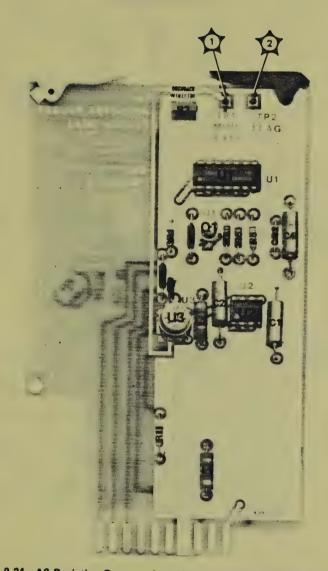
A9 Deviation Detector Assembly Component Locations (Errata)
